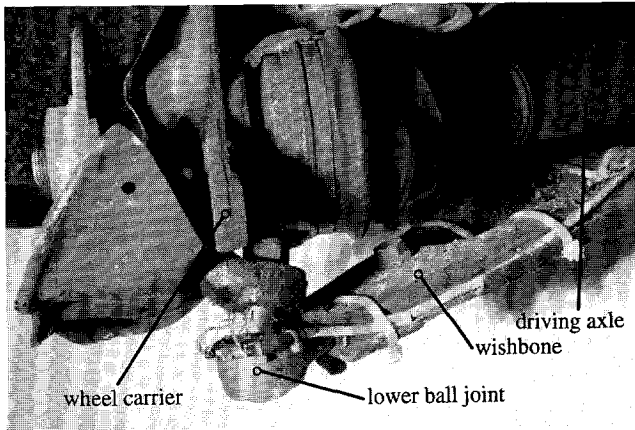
Gauged lower ball joint mounted to wishbone and wheel carrier
